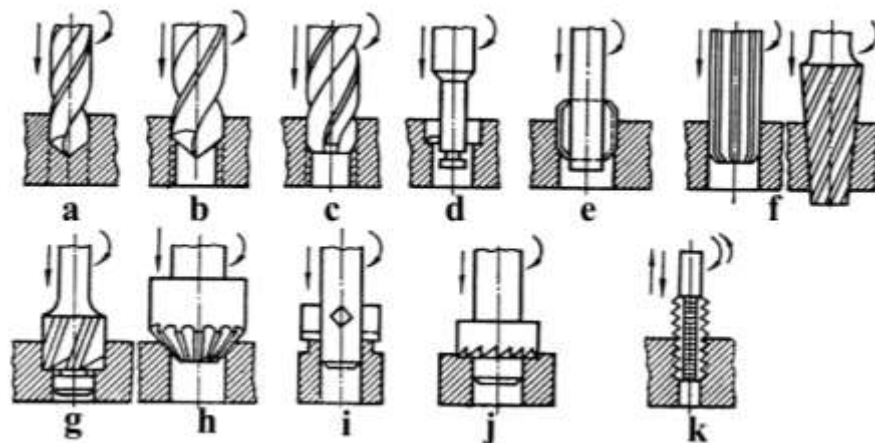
Main operation of hole machining: a – drilling; b – boring; d, e – enlarging by cutting tools; f – reaming; g – counterboring; h – countersinking; i, j – spot-facing; k – threading
